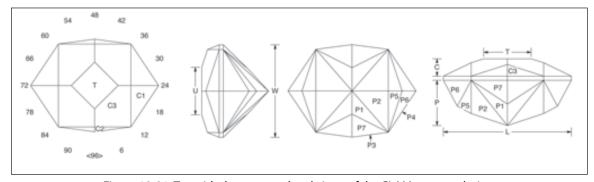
Top, side, bottom, and end views of the CLAMour gem design.
